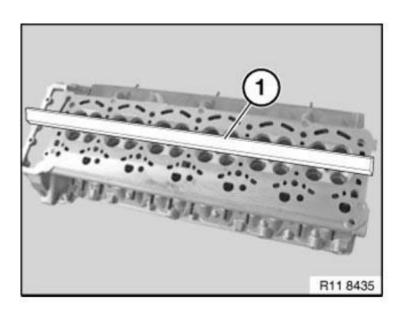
Checking Cylinder Head Sealing Face Evenness Using Standard Straightedge
